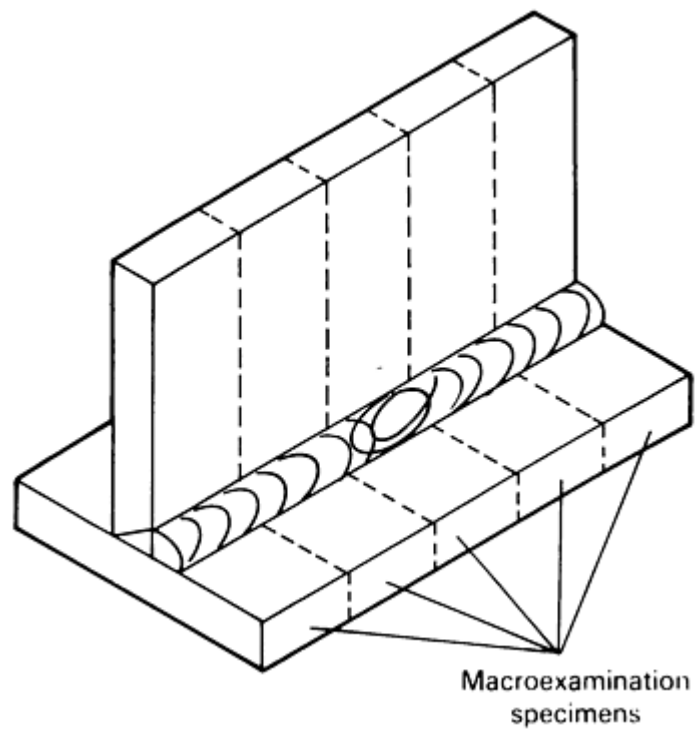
PARTIAL-PENETRATION WELD SPECIMEN
